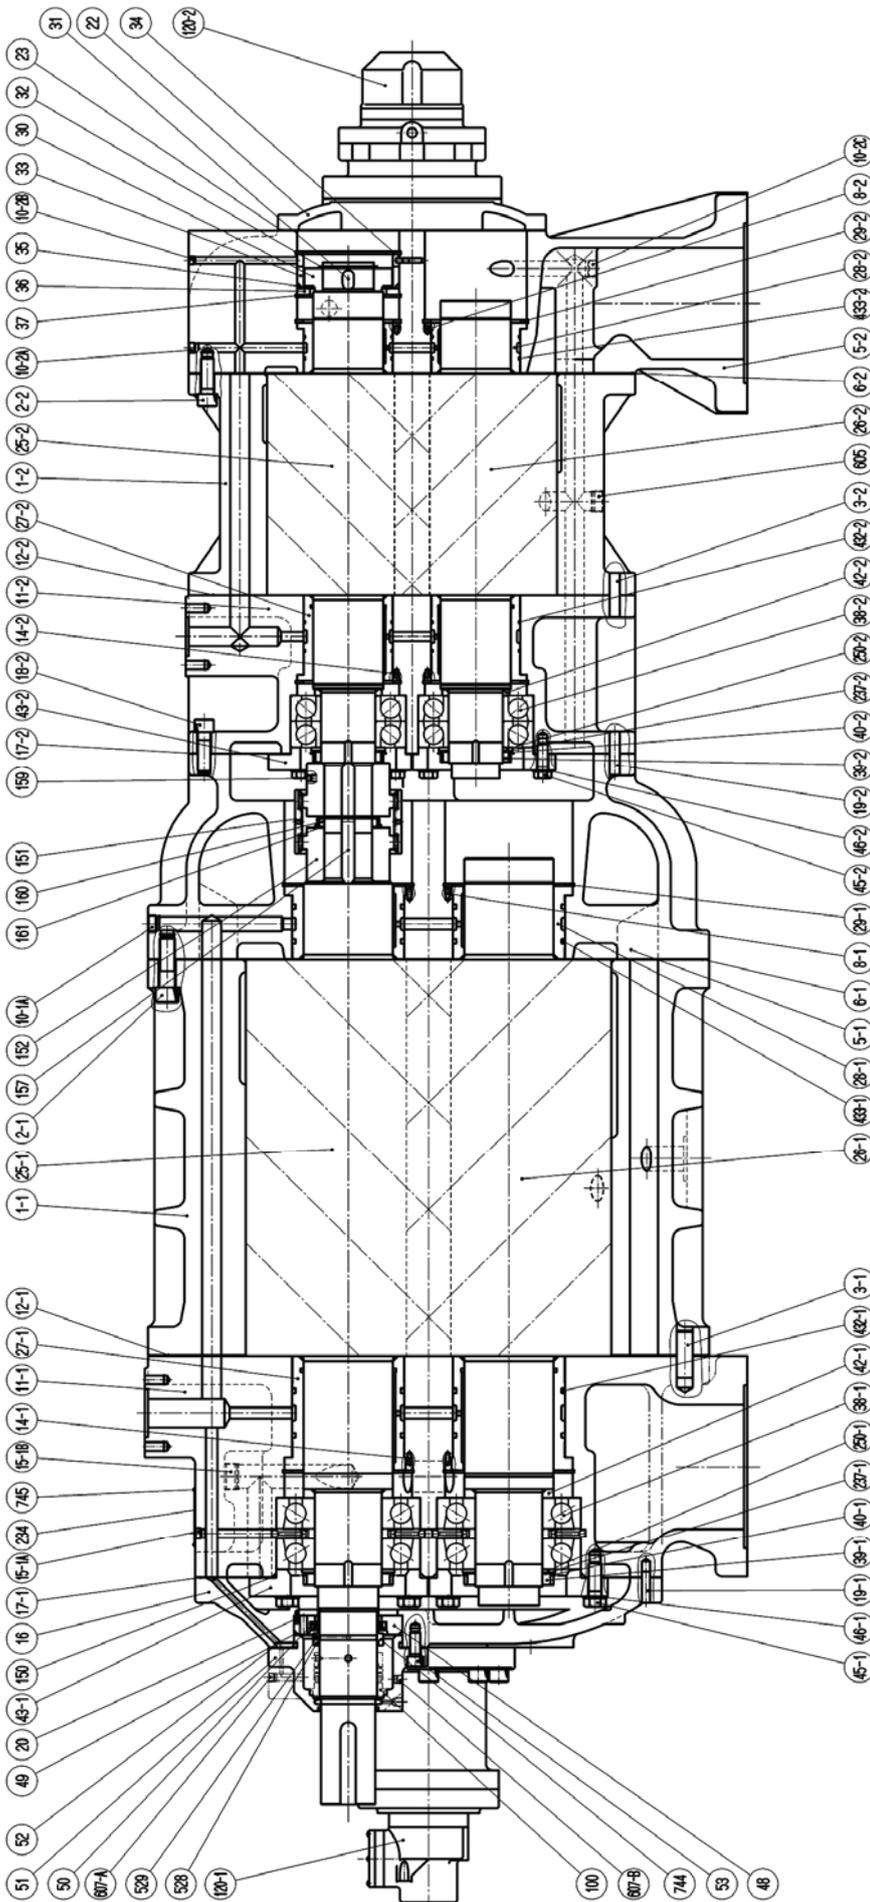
3225LLMC Assembly Sectional View (Horizontal)
